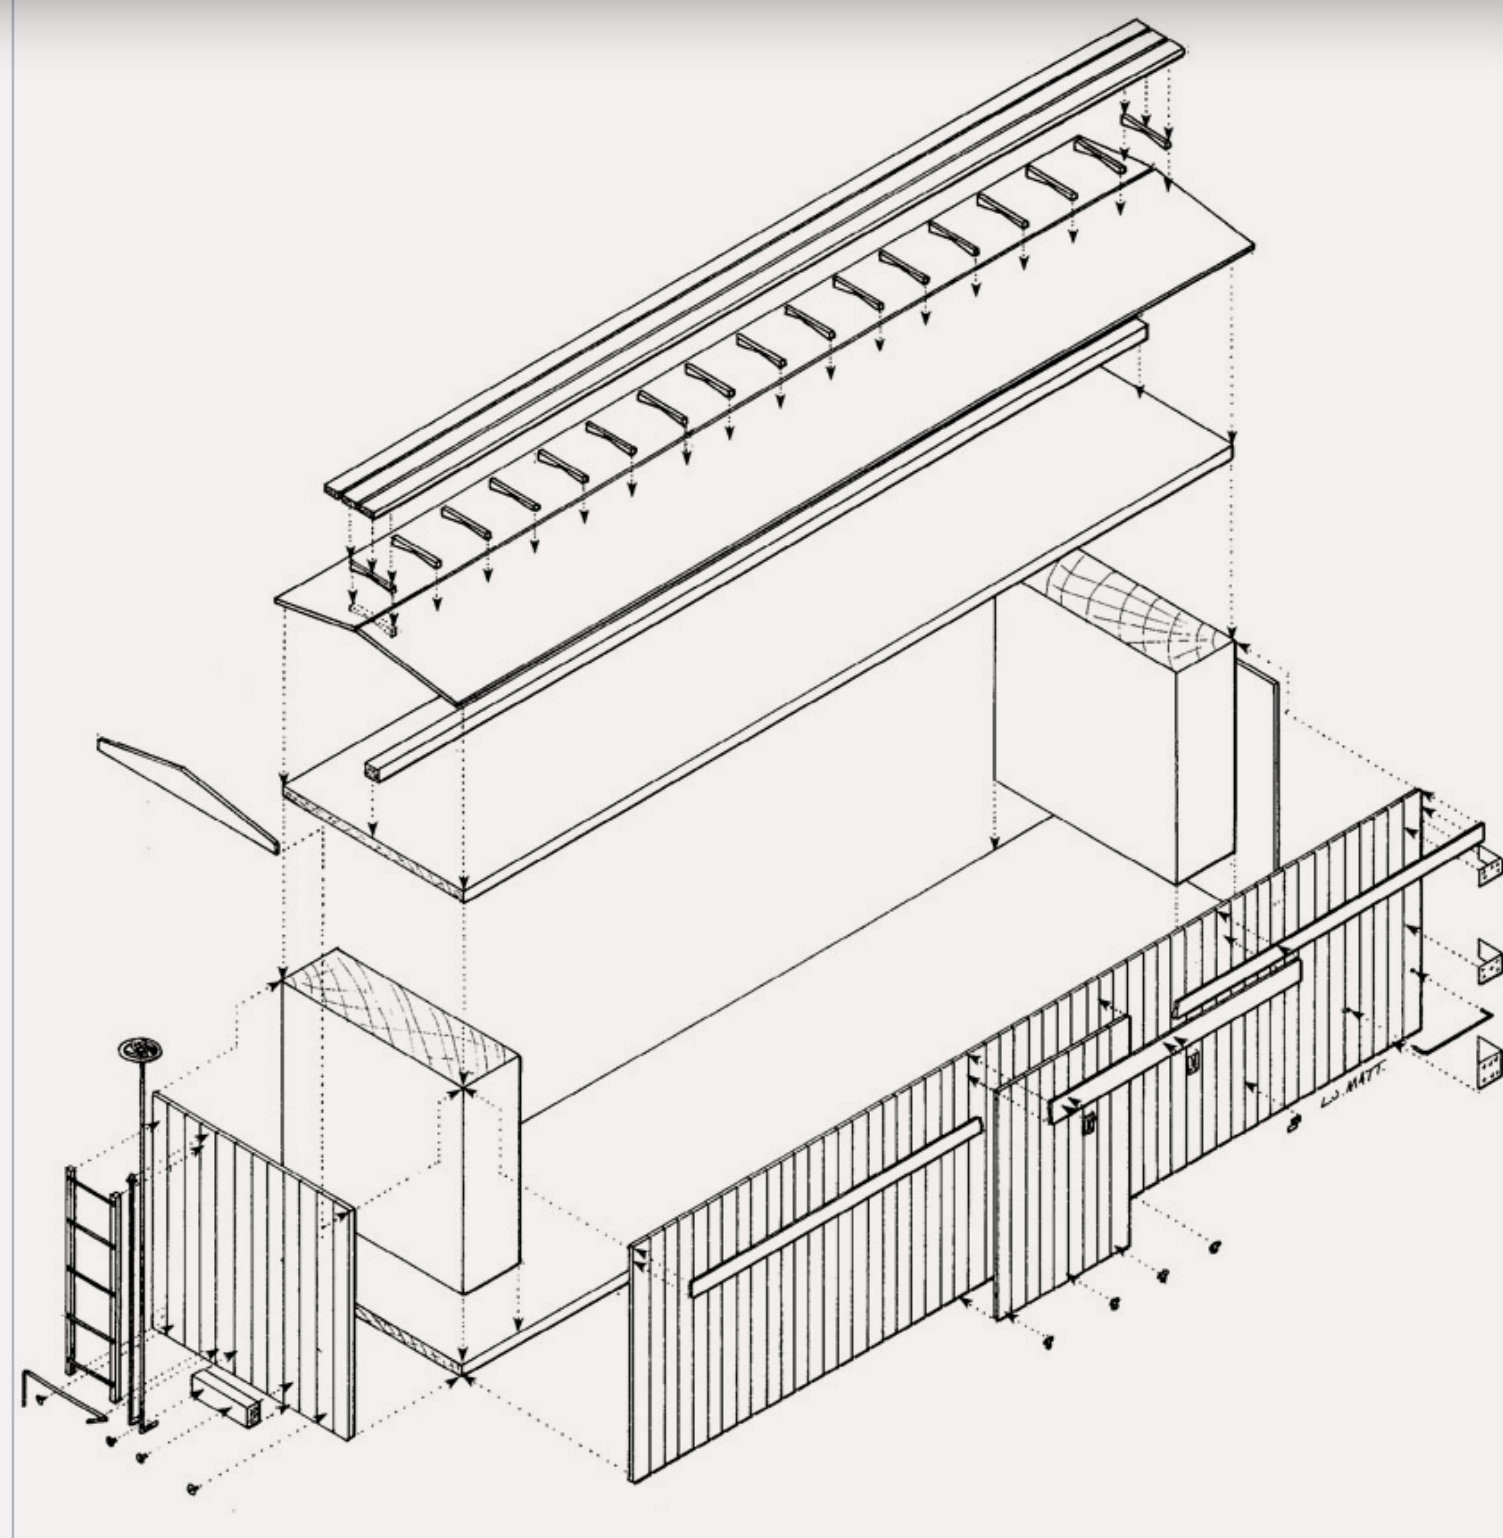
The dimensions are open to interpretation and can be filled in as you decide on the style of your car. This drawing is typical of a 30 ton box car and a 20 ton refrigerator car. The construction technique of the box and refer cars is the same design used for the old printed paper sided car kits that were the norm when I was a kid. The blocks of wood at either end make the car extremely sturdy. Watch the weight of the blocks so you don't make a car that is too heavy. Use soft wood for the blocks to facilitate installing the grabirons. Ladder stock may be substituted for the right hand side and end grabirons. I use grabirons and a drilling jig to keep the cost low and installation easy. Index card stock makes excellent corner braces, as do paper staples for steps.
